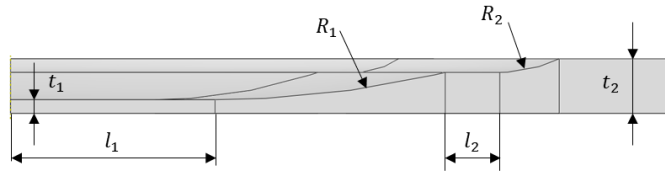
Dimensional parameters for geometry modification of the biaxial specimen (side view of eighth model).
